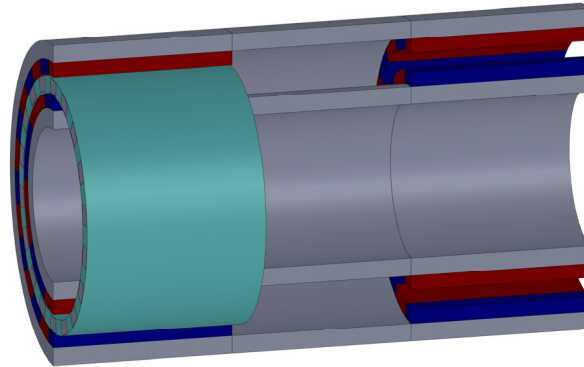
Magnetic gearbox working at first gear ratio  $\tau_1$
